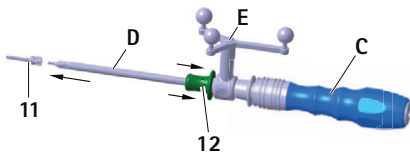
Pick up the S⁴C screw with S⁴C screwdriver
